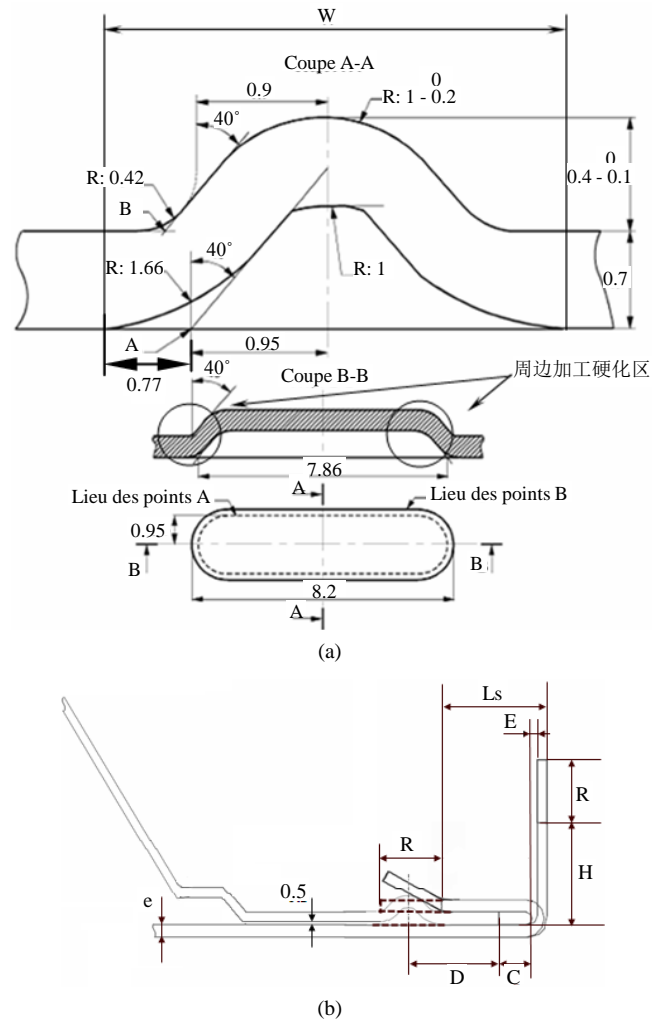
Emboss shape and position on hood week welding. (a) Emboss dimension, (b) emboss position
